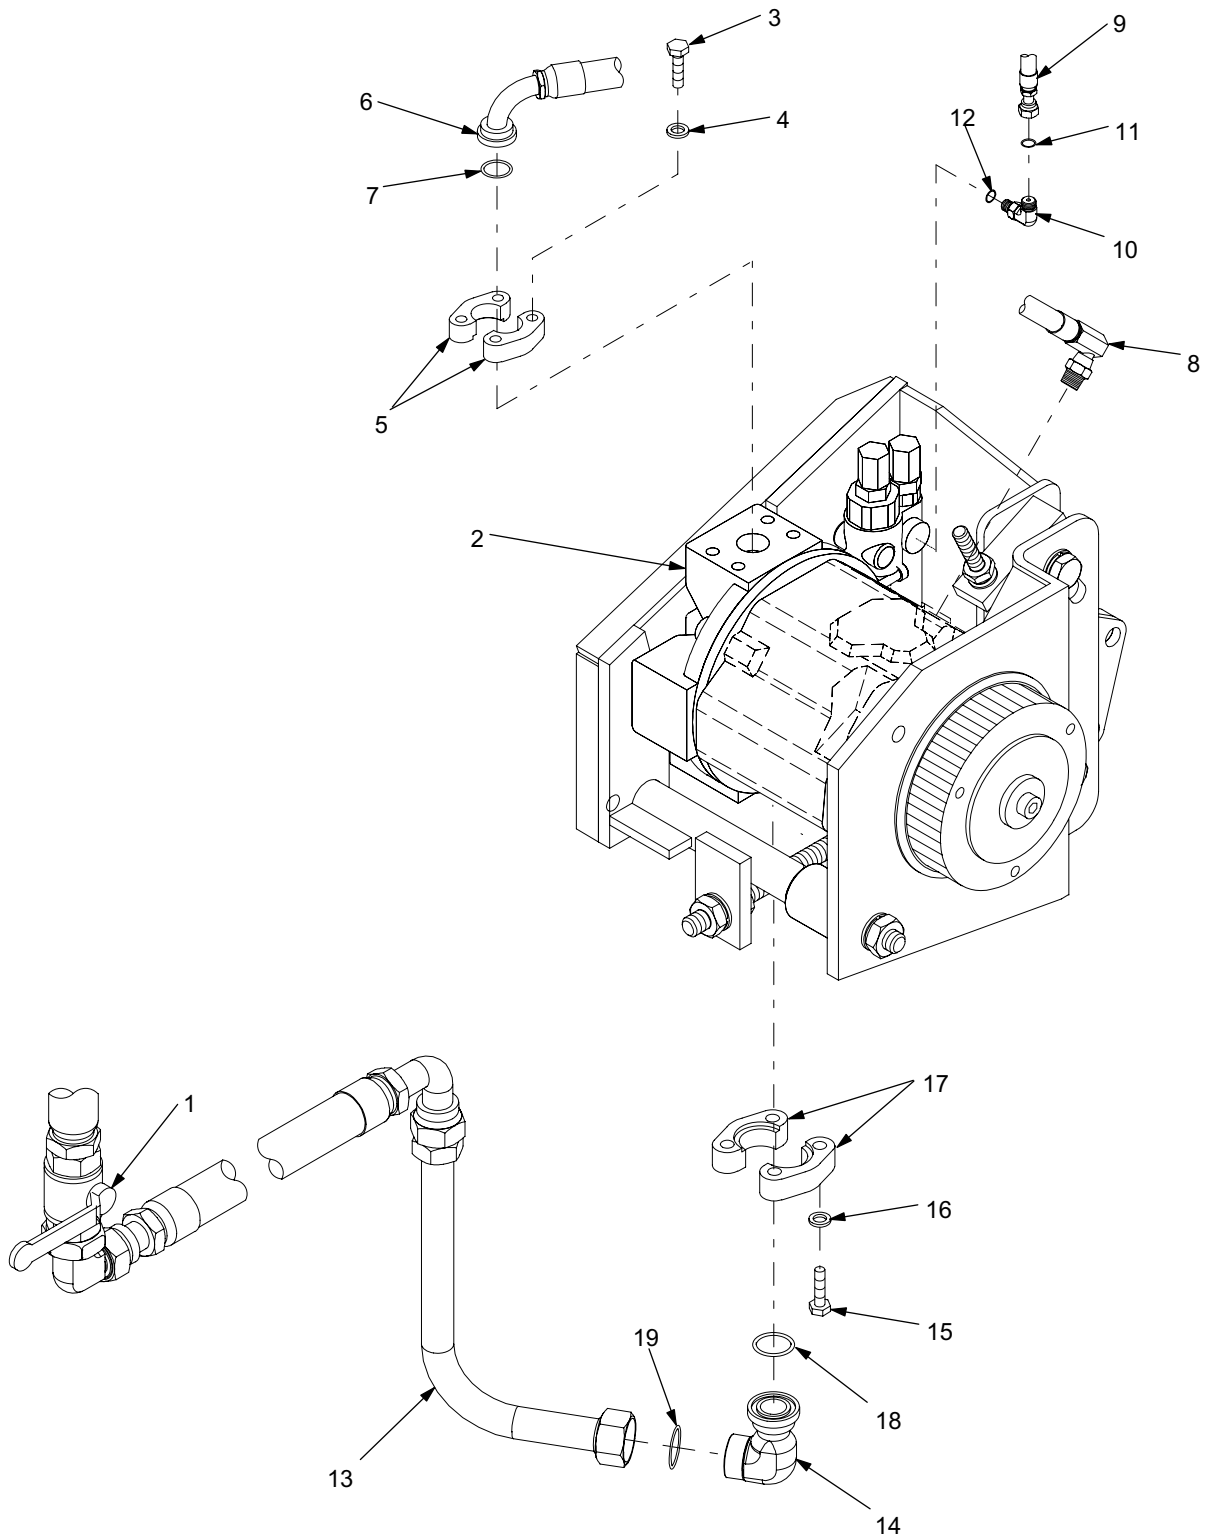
Hydraulic Pump Replacement (Sheet 1 of 3)
